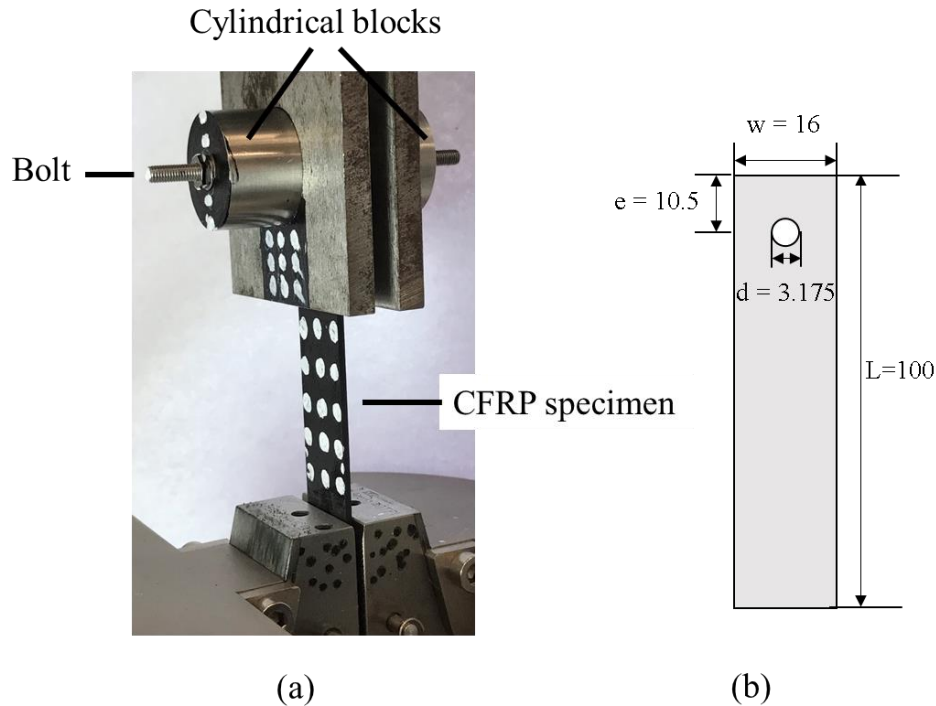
(a) Schematic of the set-up for the bearing testing and (b) an illustration of the specimen geometry. All the units shown in the figure are in mm.
